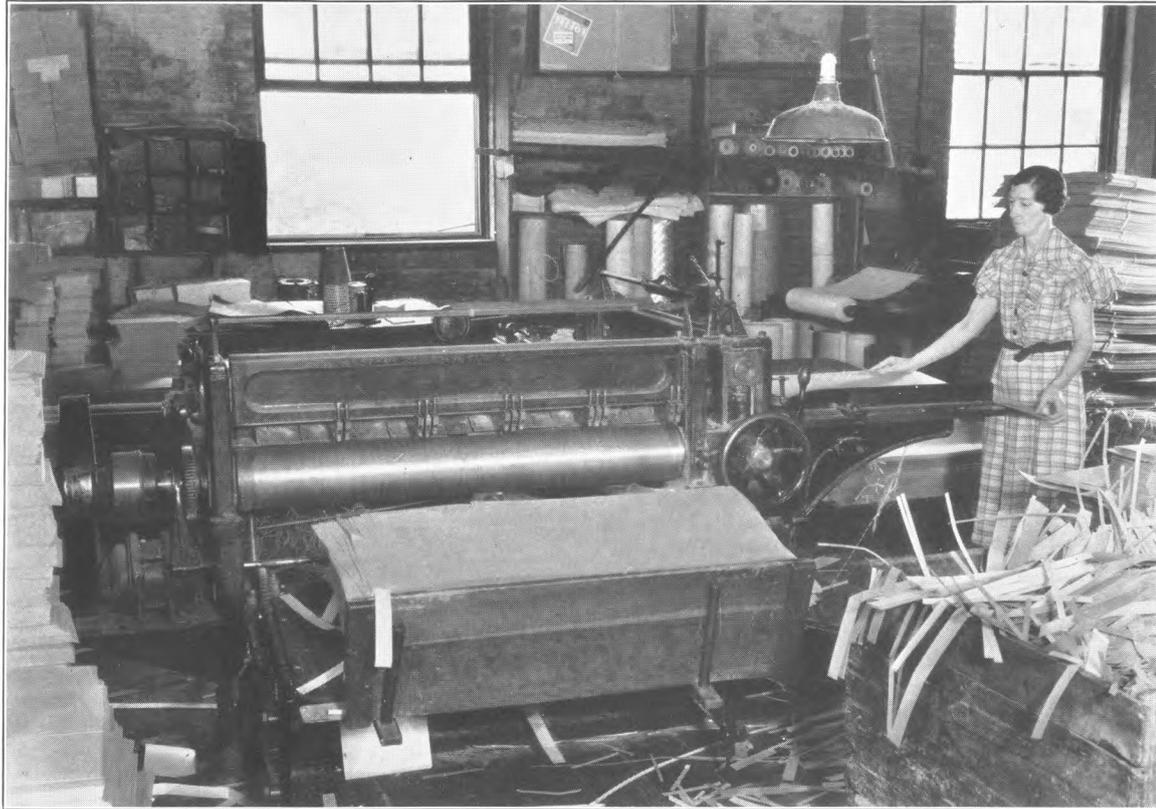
SCORING BOARD BLANKS ON A DOUBLE-SCORING MACHINE.
